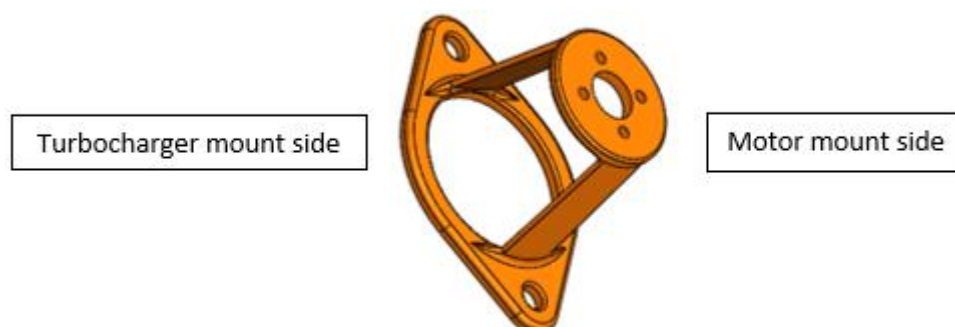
Initial MKI concept design for mounting motor to turbocharger
